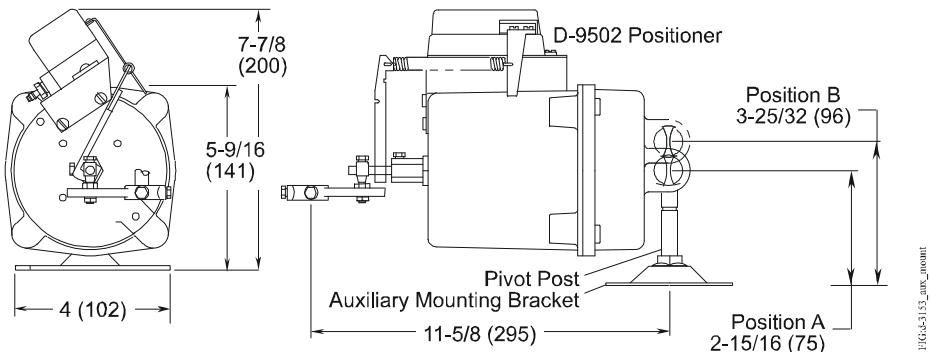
D-3153 Pneumatic Actuator with Auxiliary Mounting Bracket Dimensions, in. (mm)
